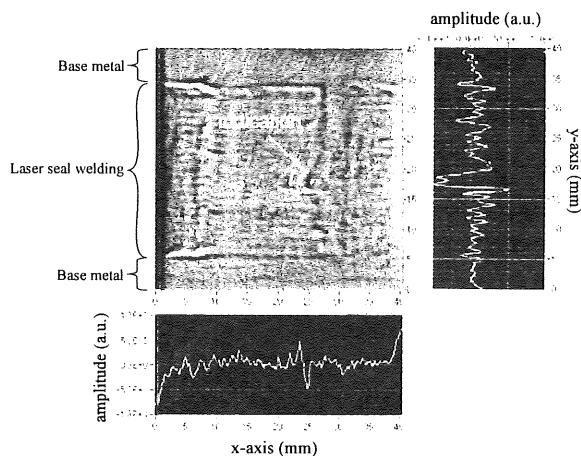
Visualized result of surface inspection with multifunction laser welding head
